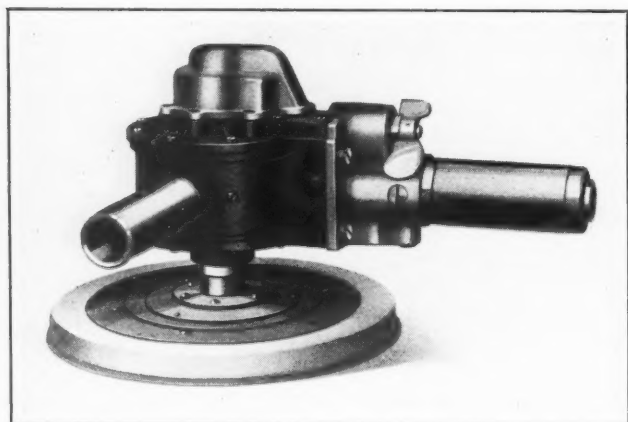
Rotor Air Sander Equipped with Sanding Disk
